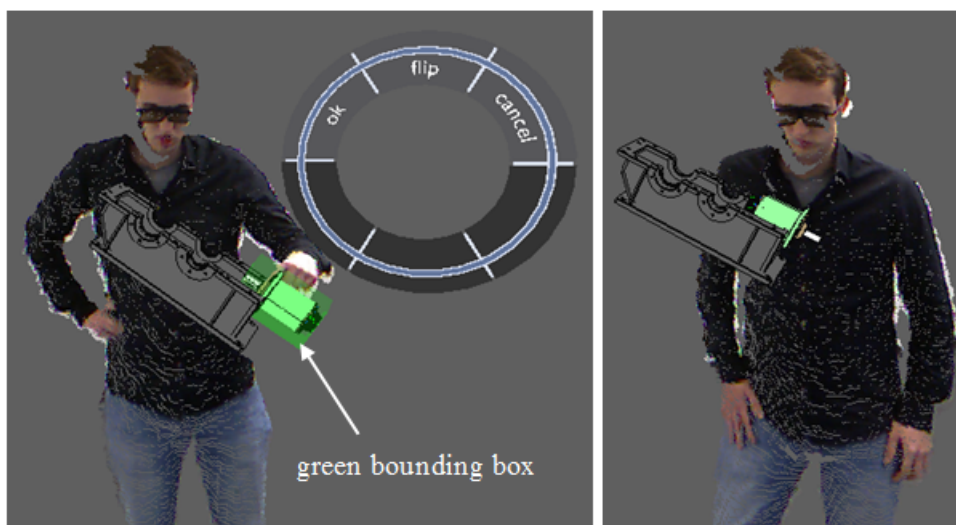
Adding a constraint (left); mounted drive shaft assembly (right)
